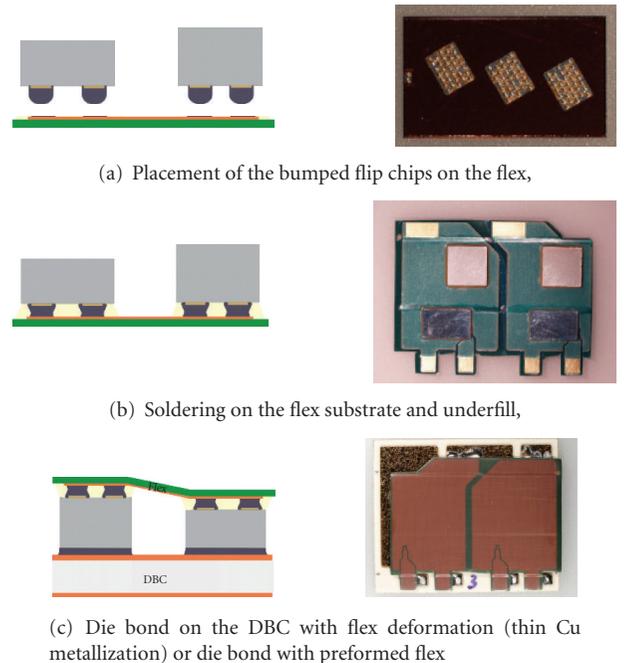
Process flow of the flip chip technology. (Right figures: photographs showing the prototype during the assembly process: (a) bumped MOSFET, (b) chips soldered to the flex, (c) complete assembly).
